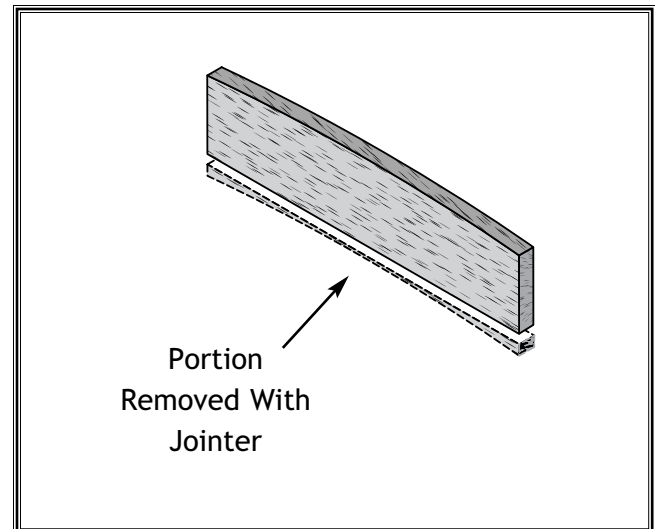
Edge jointing straightens the concave edge of the workpiece.
